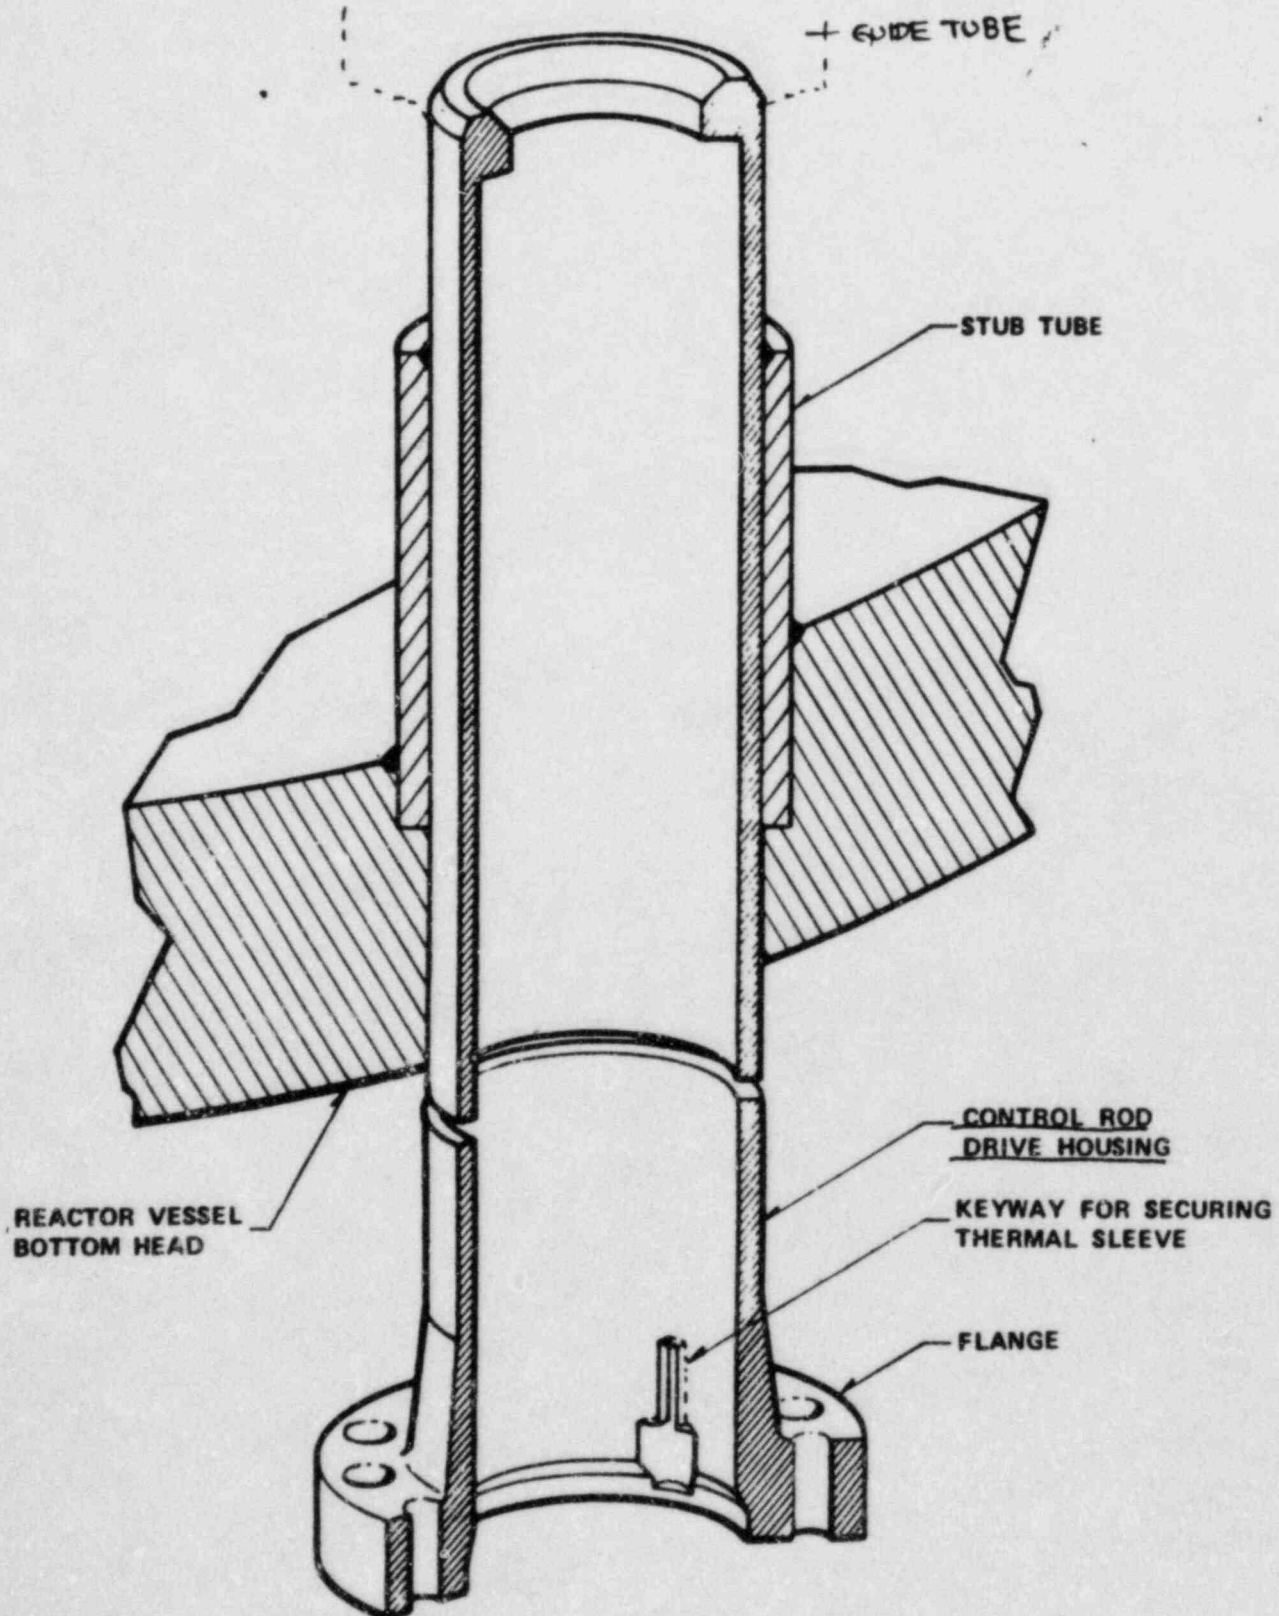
CONTROL ROD DRIVE HOUSING
